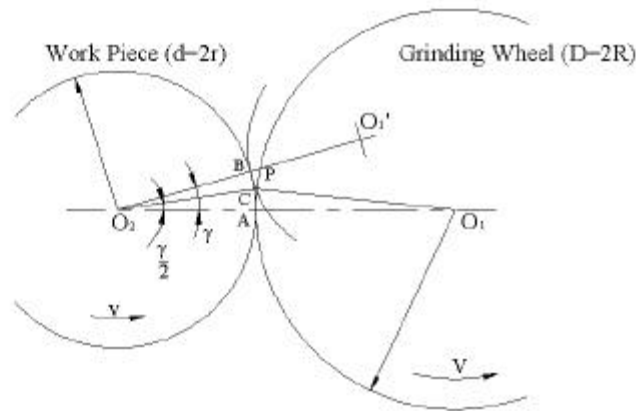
Relative motion between grinding wheel and workpiece in cylindrical grinding
